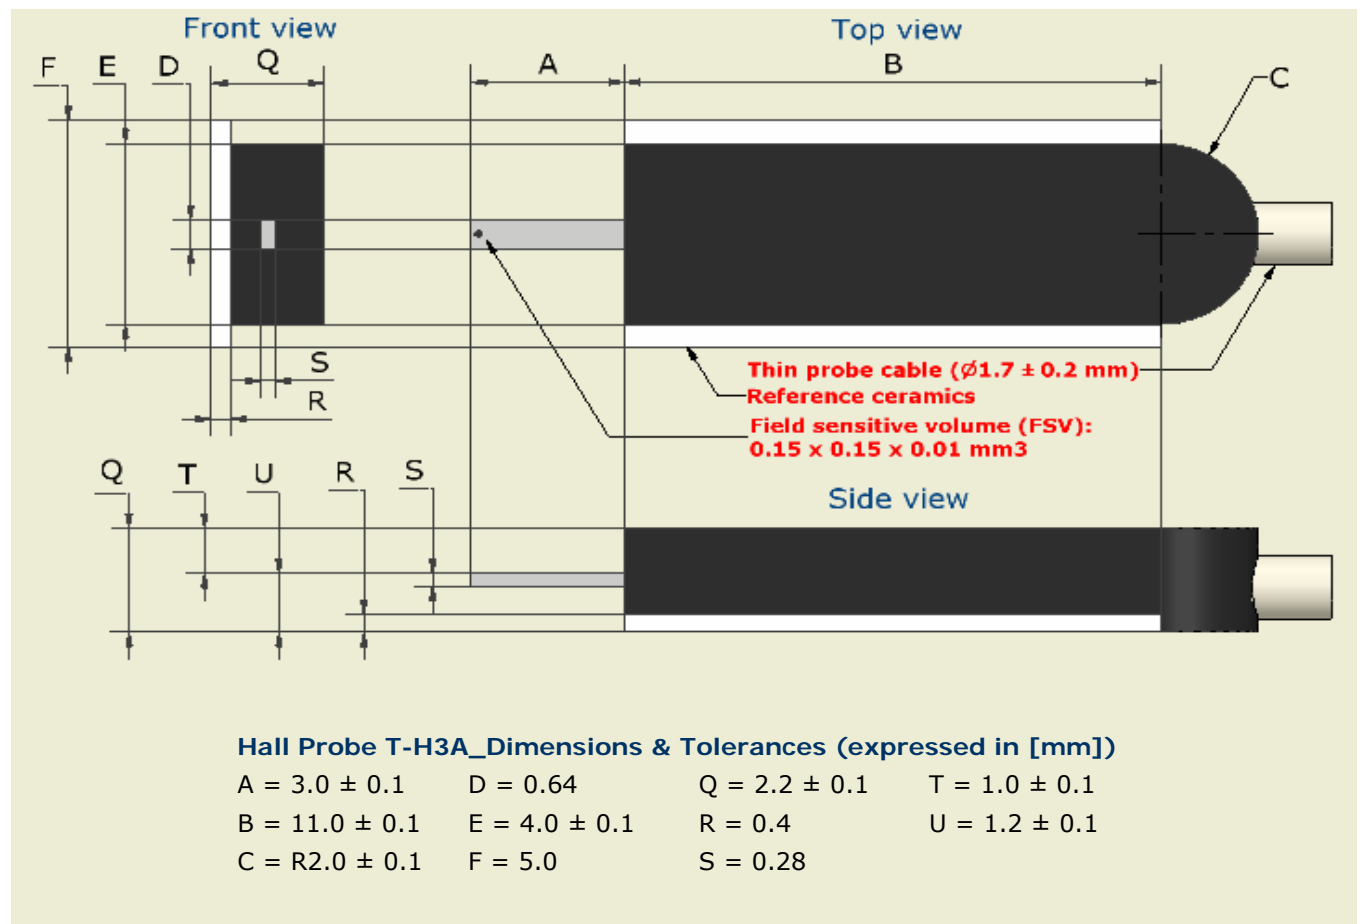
Three orthogonal projections of the SENIS T-H3A Hall probe (with appropriate Probe dimensions and tolerances)
